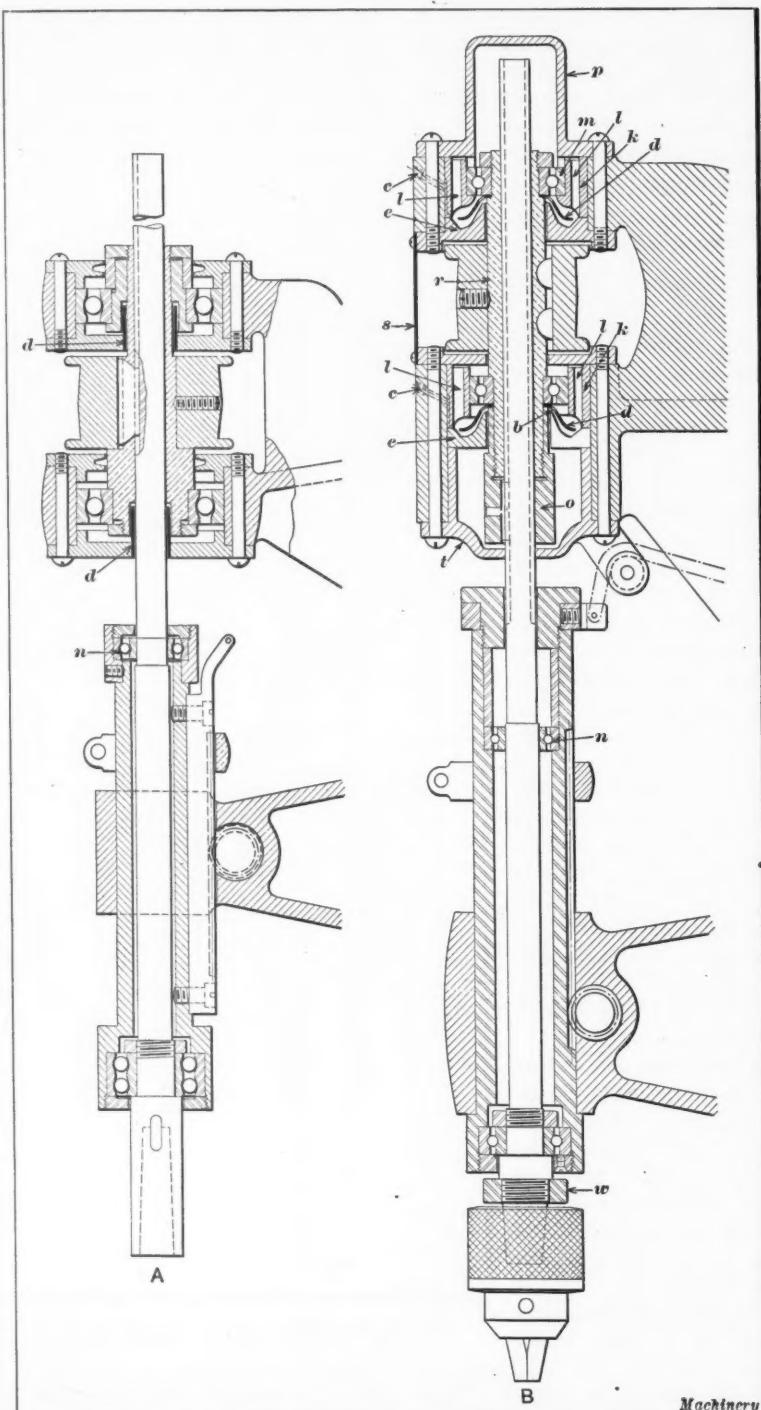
(A) Design which proved a Failure owing to Method of Lubrication.
